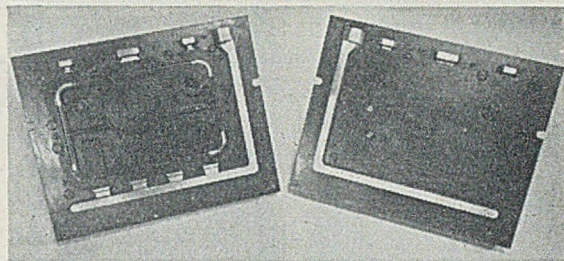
Patternplates for a Mounting Panel, 14 by 18 in.
